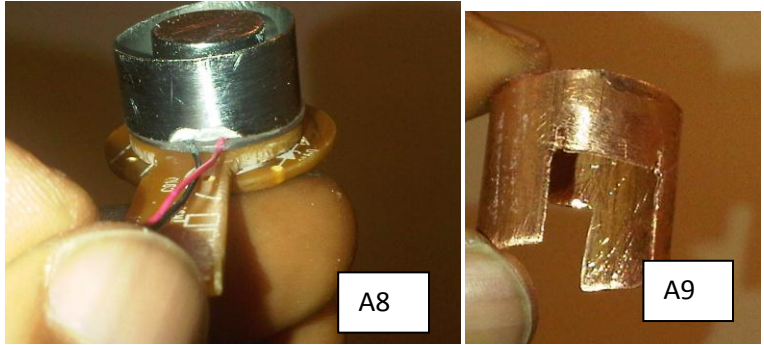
above is the outer sleeve. Force applied to the top piece is transmitted by this sleeve to the bottom piece while sliding freely around the stainless inner sleeve. The two cut-out areas ensure that the outer sleeve slides around the support handle.
